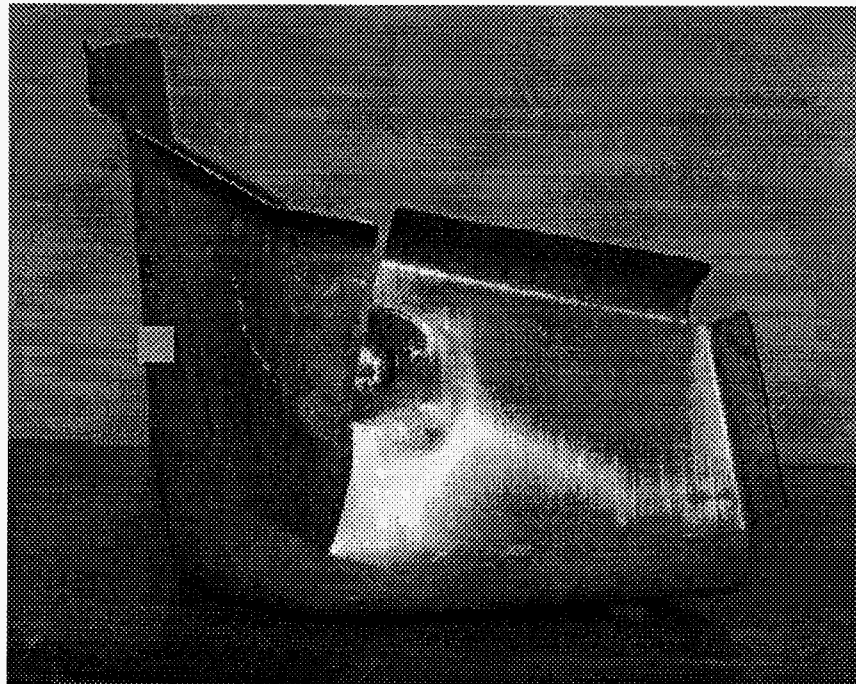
Shock tower part after localized impact testing showing brittle fracture
